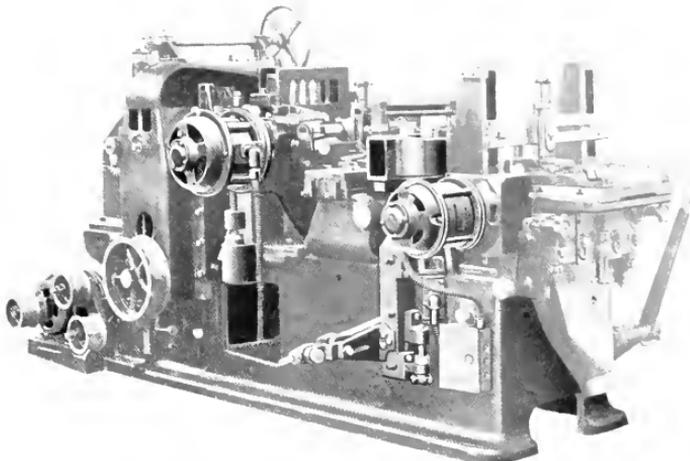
Side Moulding Machine Driven by Five Squirrel Cage Motors, Two Horizontal and Two Vertical, All Directly Connected to Spindles. Feed Motor is Shown at Left Near the Floor
